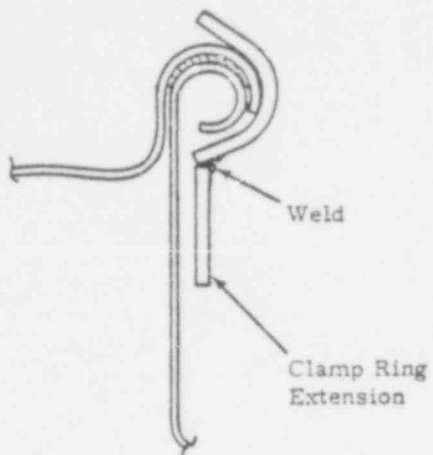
Details of Top and Bottom Clips Welded to Lock Ring
